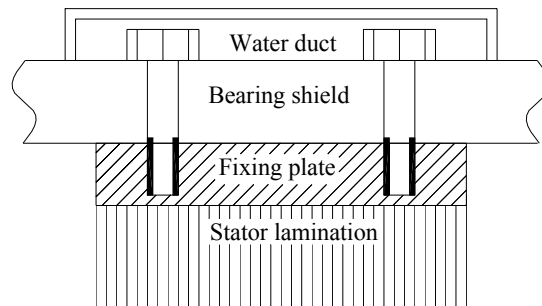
Cross-sectional view of a water duct fixed on the bearing shield of the test machine.
